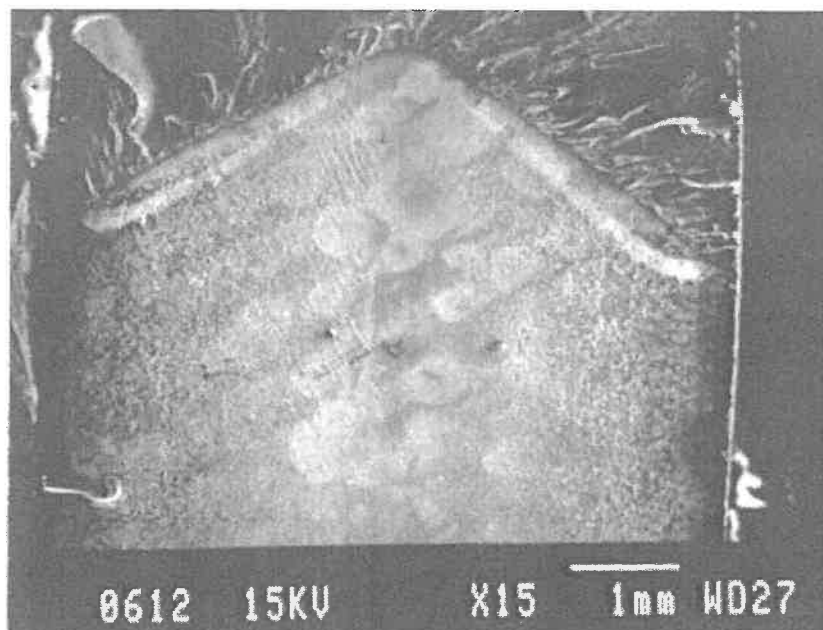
Fracture surface just before and after final fracture for the FCP test ncd2: specimen thickness direction is horizontal and the macroscopic cracking direction is from bottom to top.
